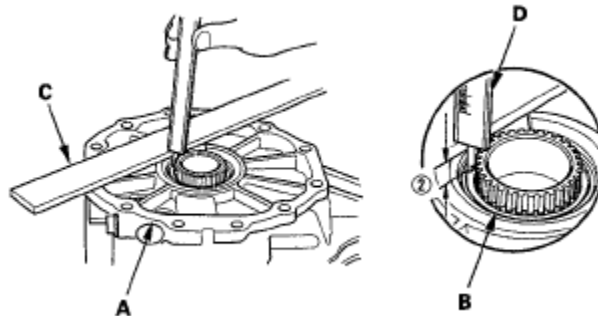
Identifying Distance Between Rear Differential Center Case End And Tapper Roller Bearing Ring Gear Contact Area
